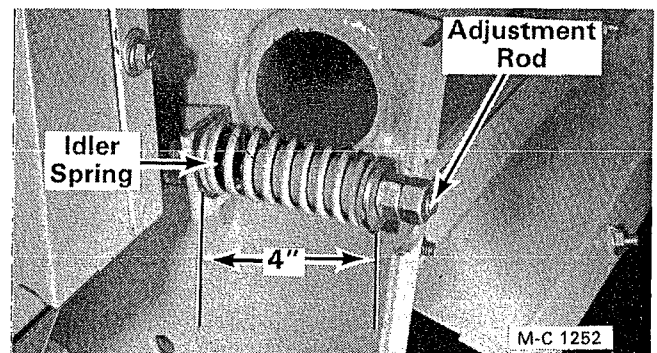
Idler Adj. Rod - S/N 49650 & Up
